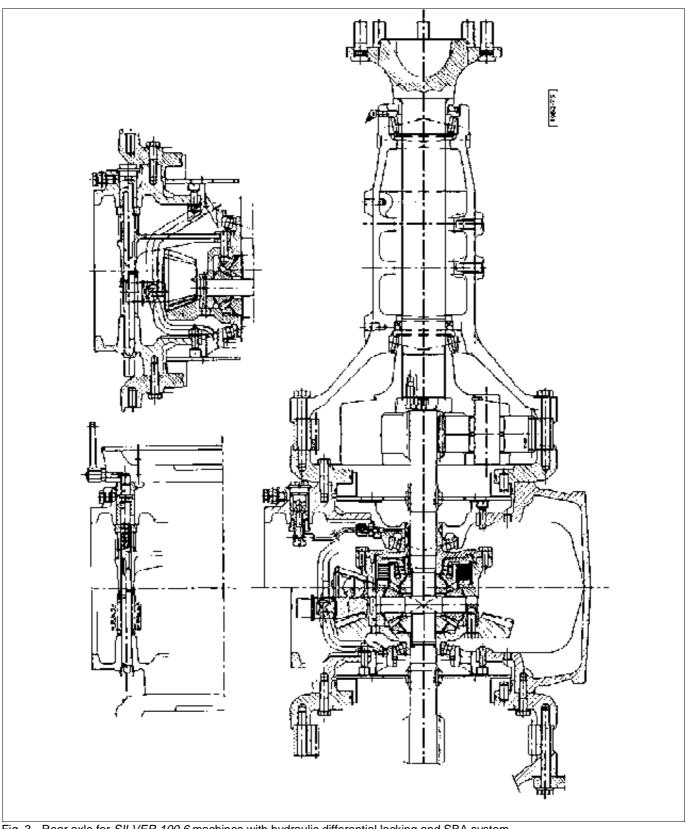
Rear axle for SILVER 100.6 machines with hydraulic differential locking and SBA system.
